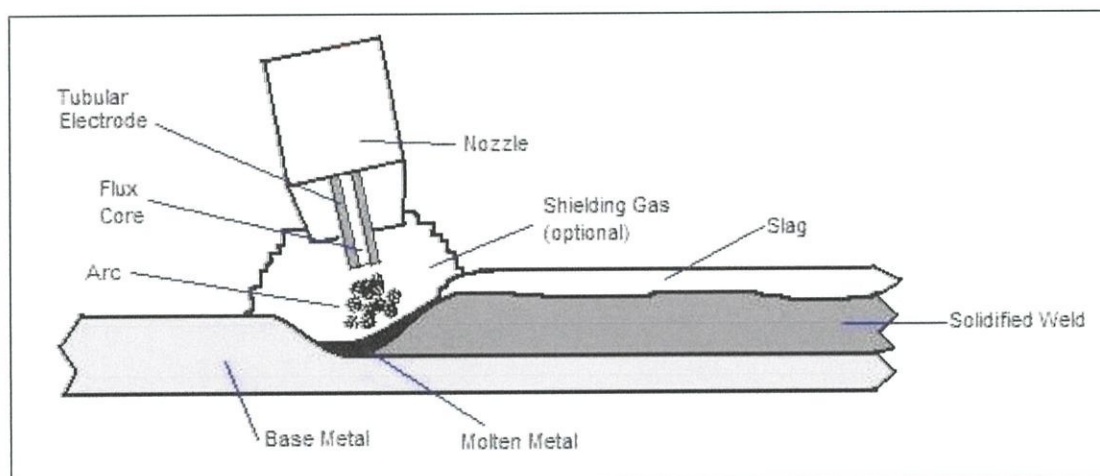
Shows a drawing of FCAW at the weld point.
